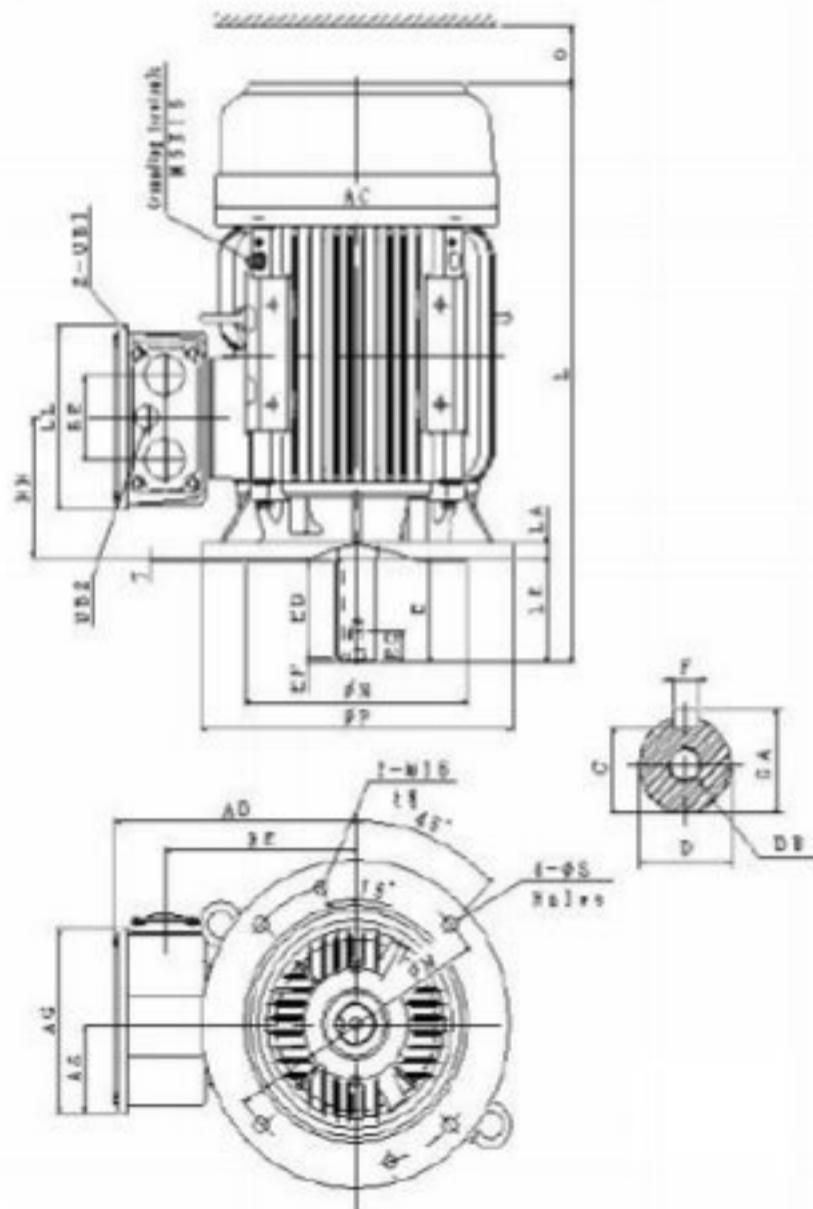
Outline drawing of cast iron design, mounting V1; frame size 160
